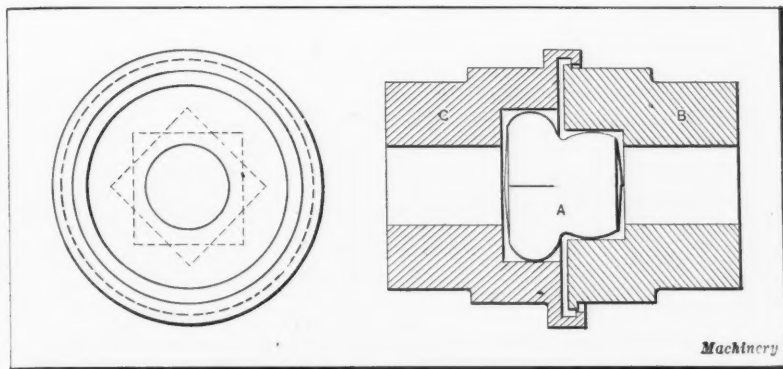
Sectional View of an Assembled Whitney Flexible Coupling
